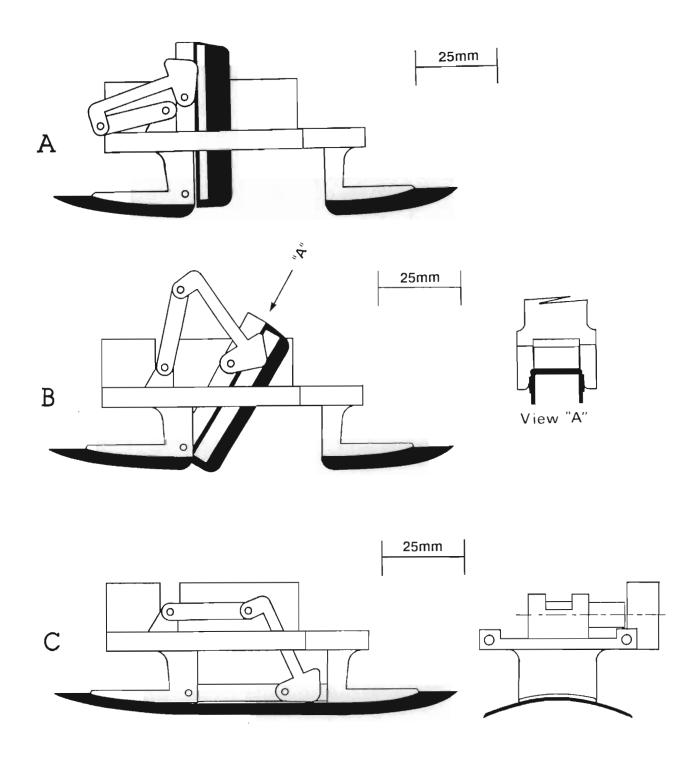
Stepwise illustration of the valve (V1) mechanism: (A) fistula valve in open position, (B) fistula valve partly closed, showing the cam holding the valve seal in folded position, (C) fistula valve in closed position with side view.
